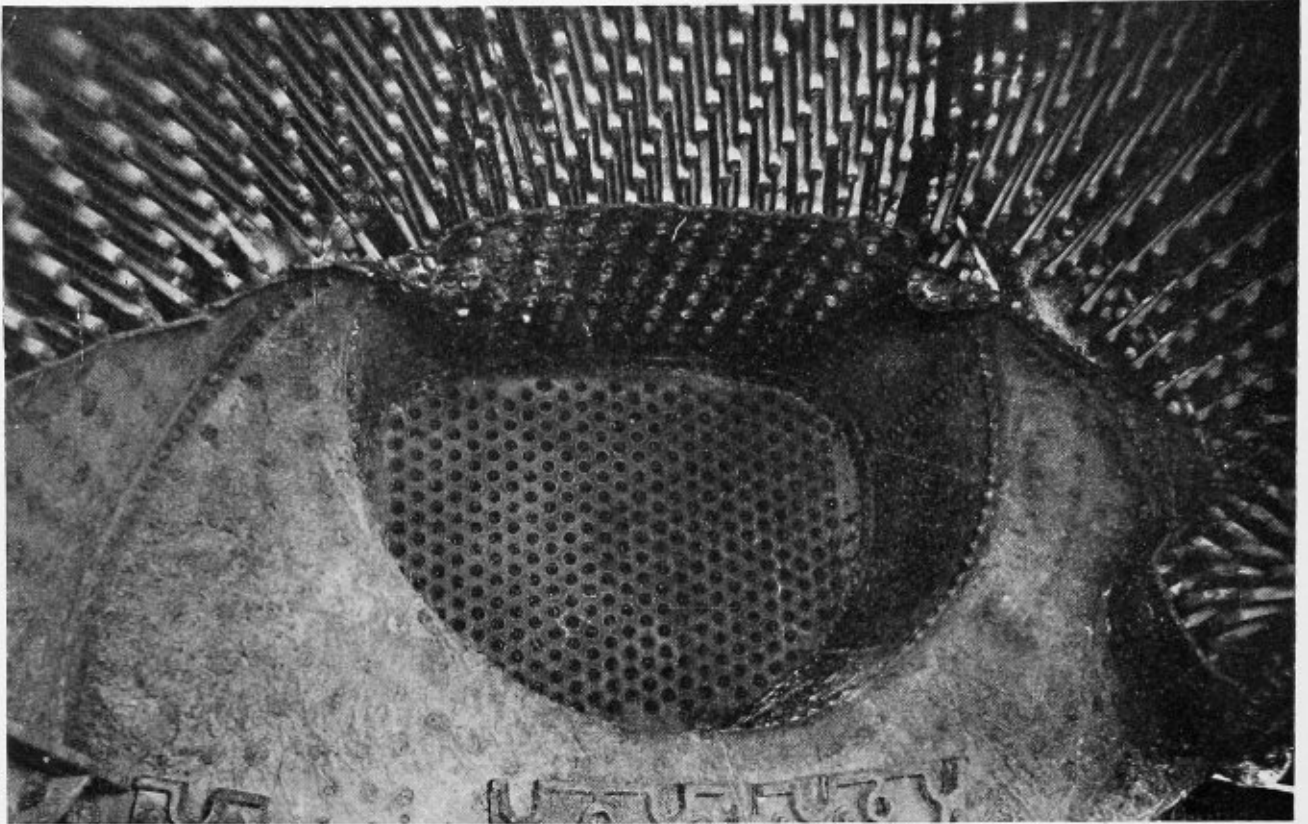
Welded Seam in Crown Sheet Failed in This Explosion While Riveted Seam at Tube Sheet Remained Intact
